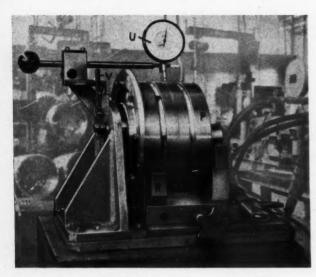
This equipment is employed at the Smiths Witney plant for checking the concentricity of rotor units after assembly. The work supports are arranged to slide to facilitate loading
